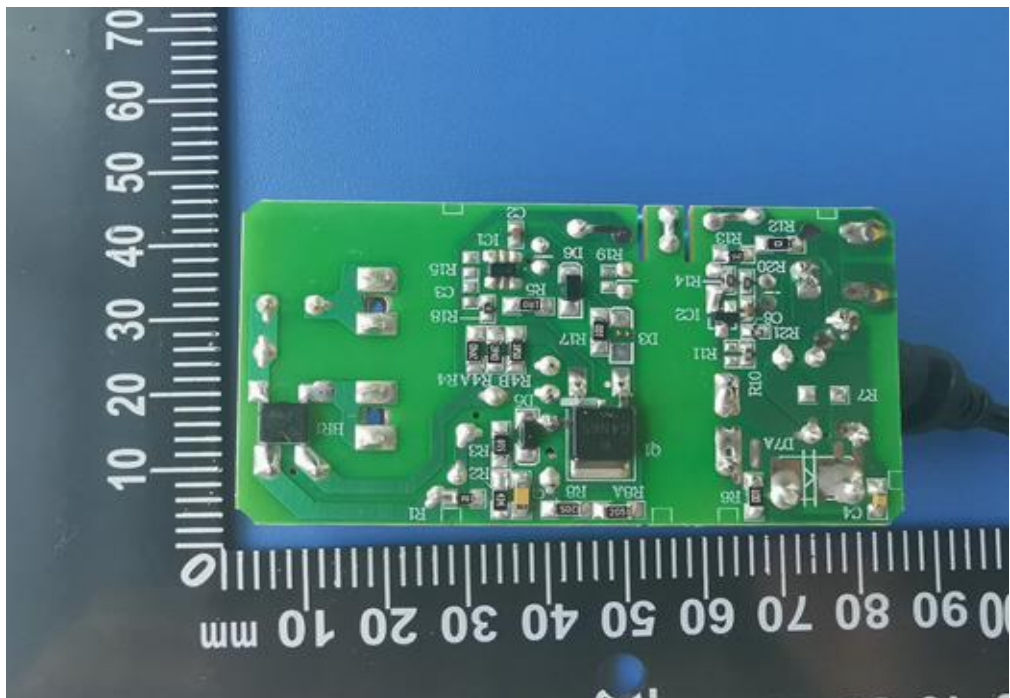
PCB bottom side view for model IVPxxxx-yyyyW (without D7A)
